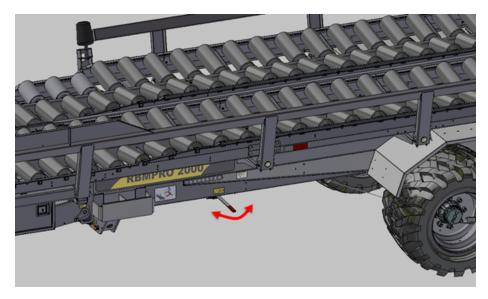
Engaging the RBMPRO 2000 Handbrake
